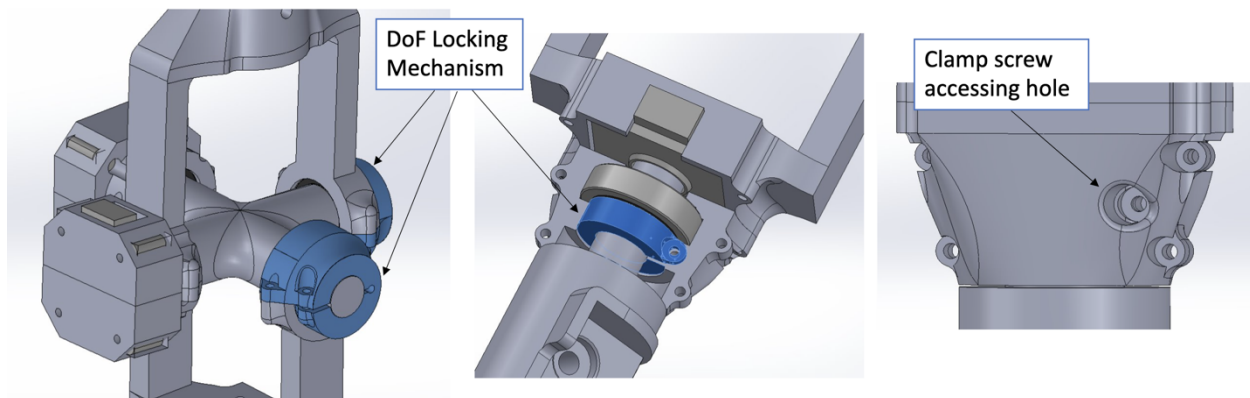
DoF-locking mechanism for the universal joint (left), pivot joint (mid), and clamp screw accessing hole (right)
